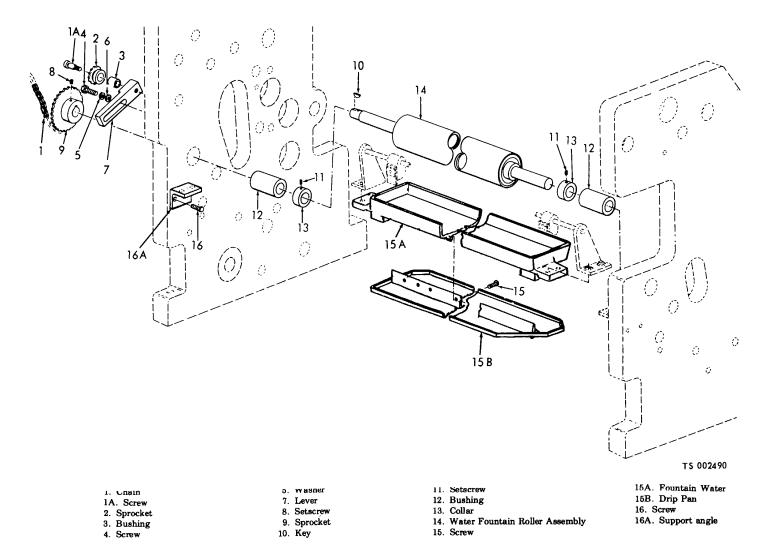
Water motion assembly (Sheet 1 of 6).
